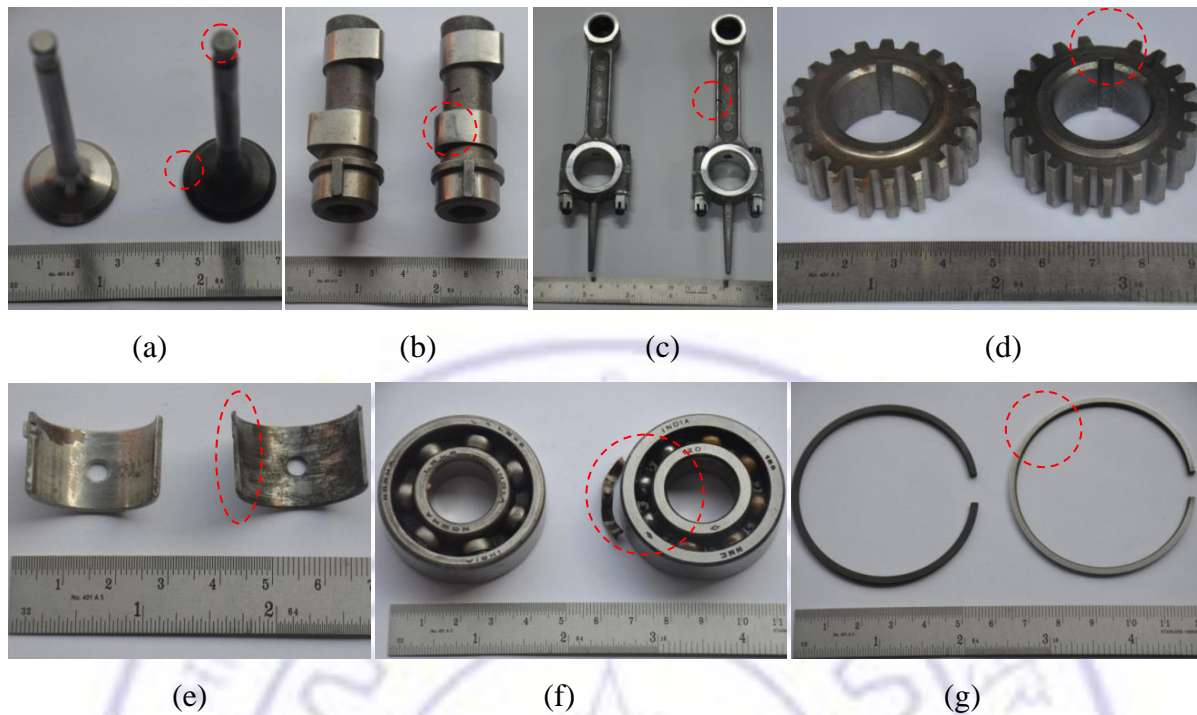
Healthy and Defective Components; (a) Worn Exhaust Valve, (b) Worn Cam, (c) Cracked Connecting Rod, (d) Tooth Missing Primary Gear, (e) Worn Crank Journal, (f) Defective Main Bearing and (g) Worn Piston Ring
